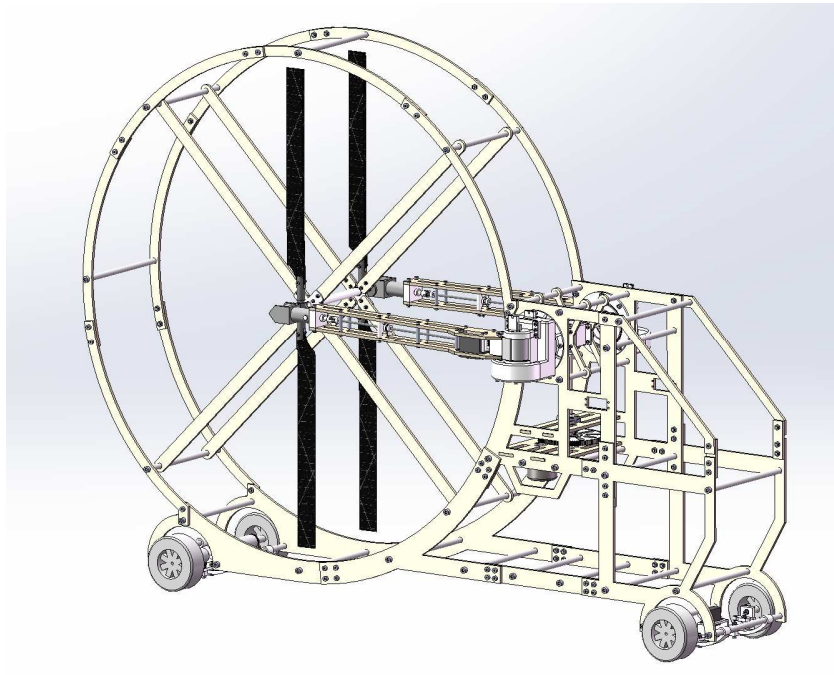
The complete assembly of the flight part, the fuselage part and the land driving part
